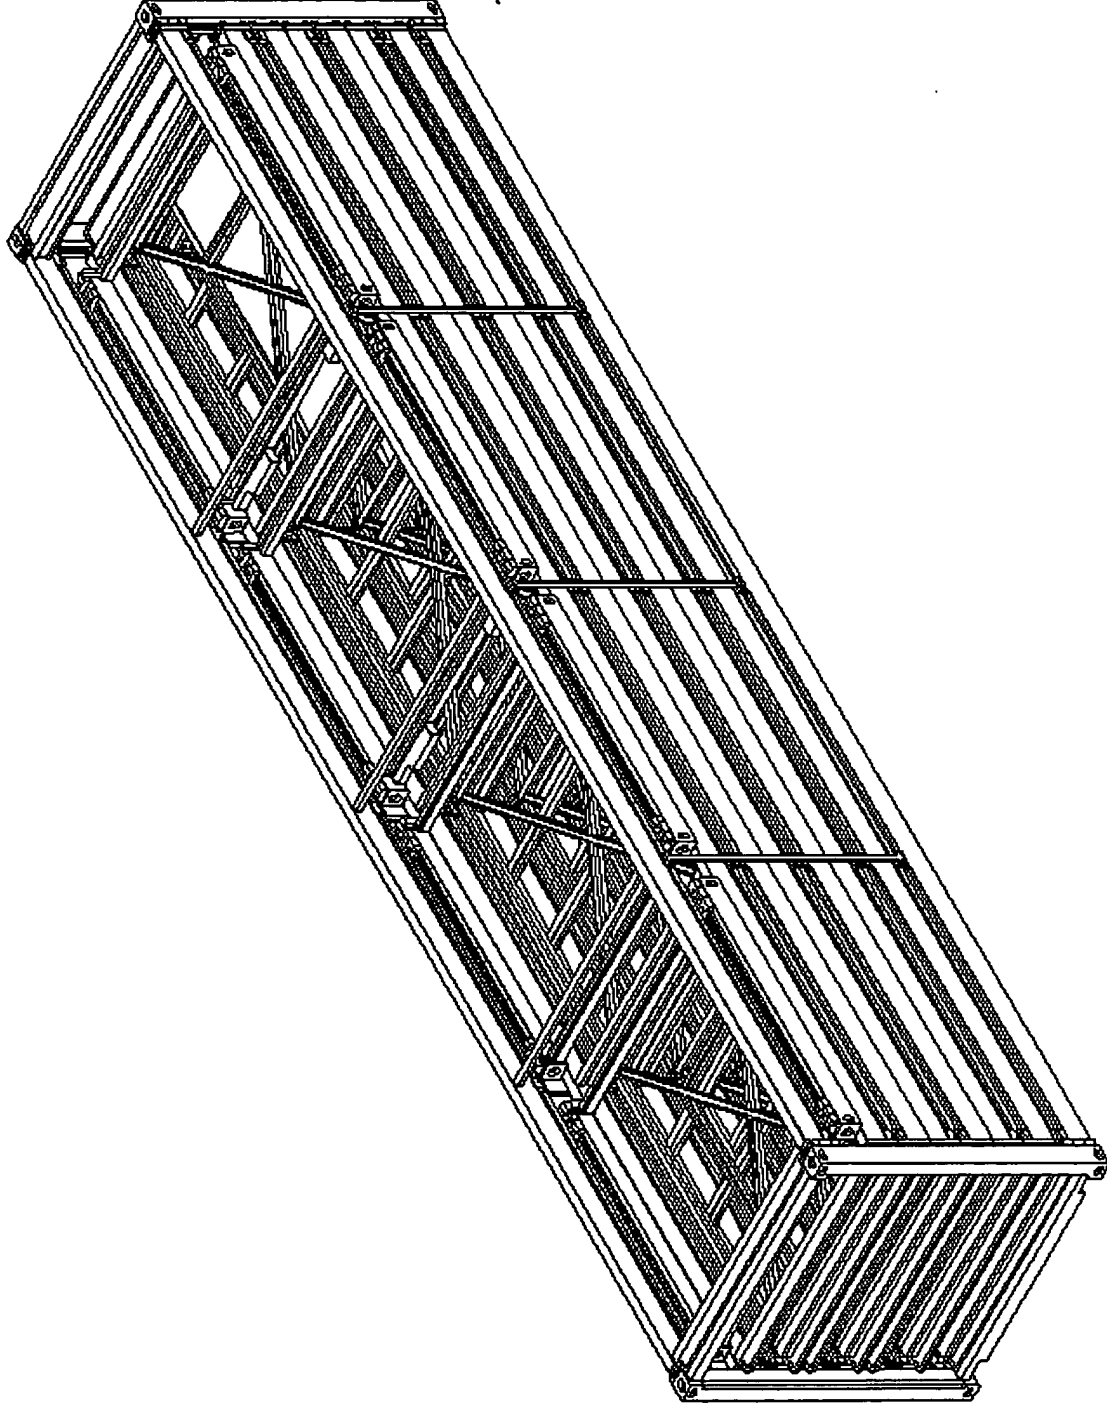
A: Step9 of disassemble and load process: The six vertical beams are assembled.
